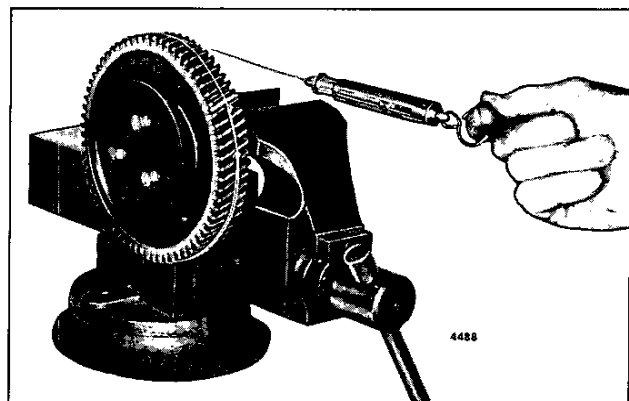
Checking Pre-Load of Idler Gear Bearing
